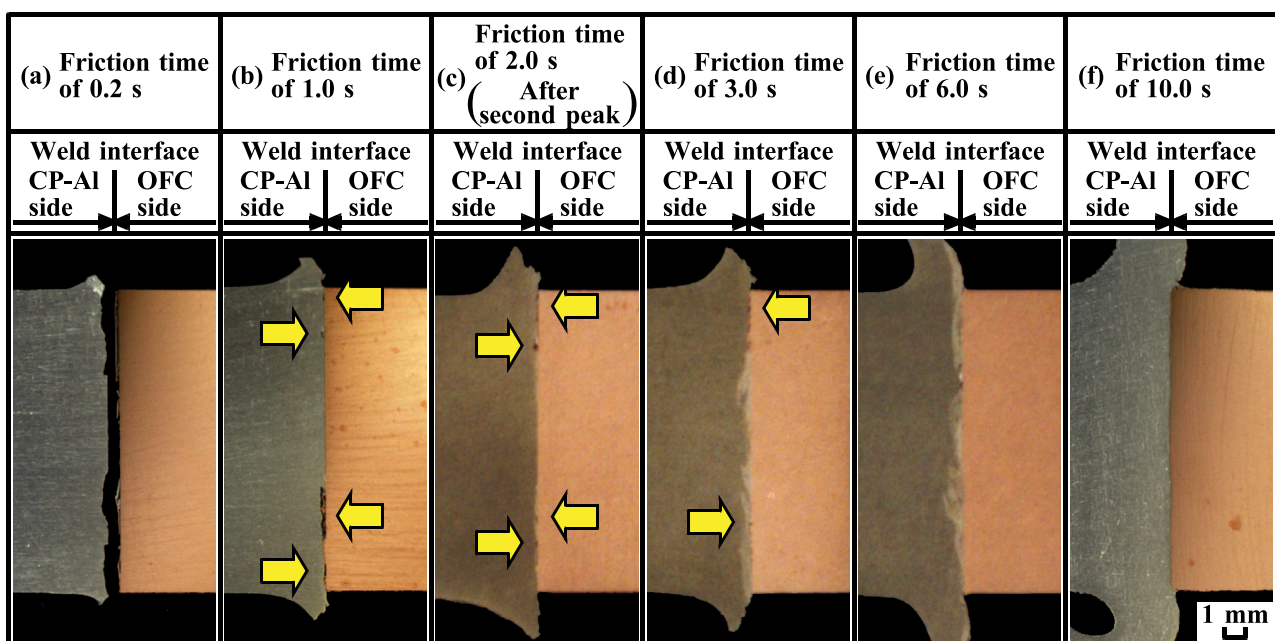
Cross-sectional appearances of weld interface of joints at various friction times.
